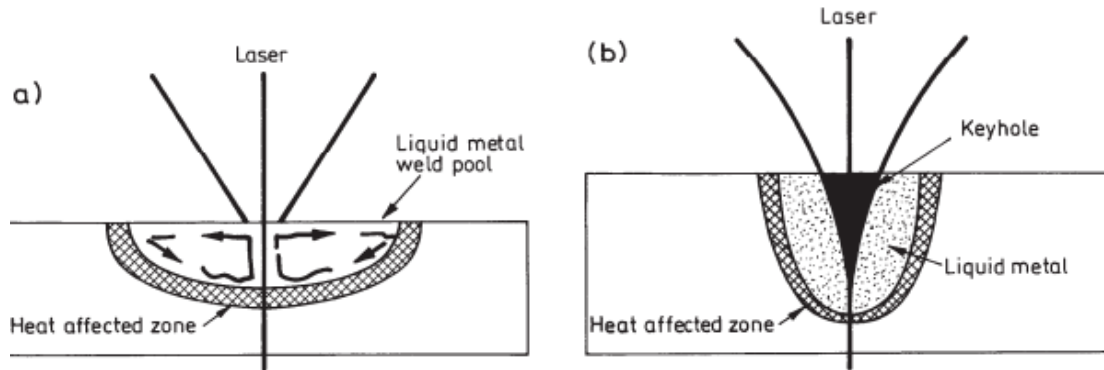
(a) Conduction melt pool (semi-circular) (b) deep-penetration (key hole) welding [22].
